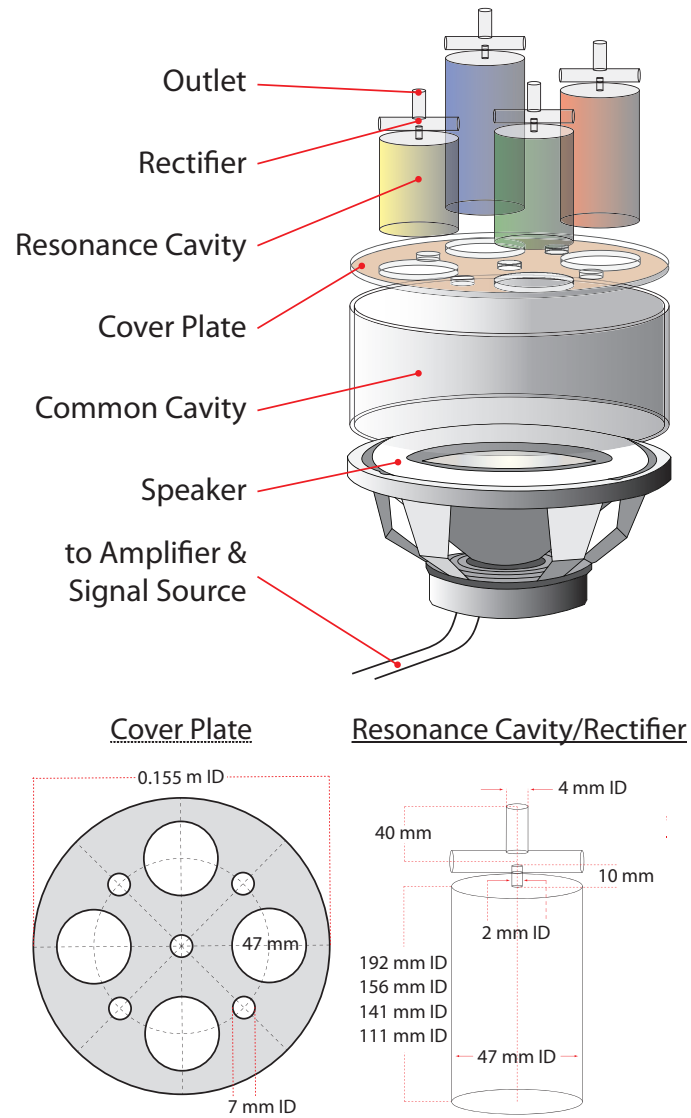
Device construction. (top) Exploded schematic view of device. (bottom) Detail of *Cover Plate* and *Resonance Cavity/Rectifier* with dimensions
